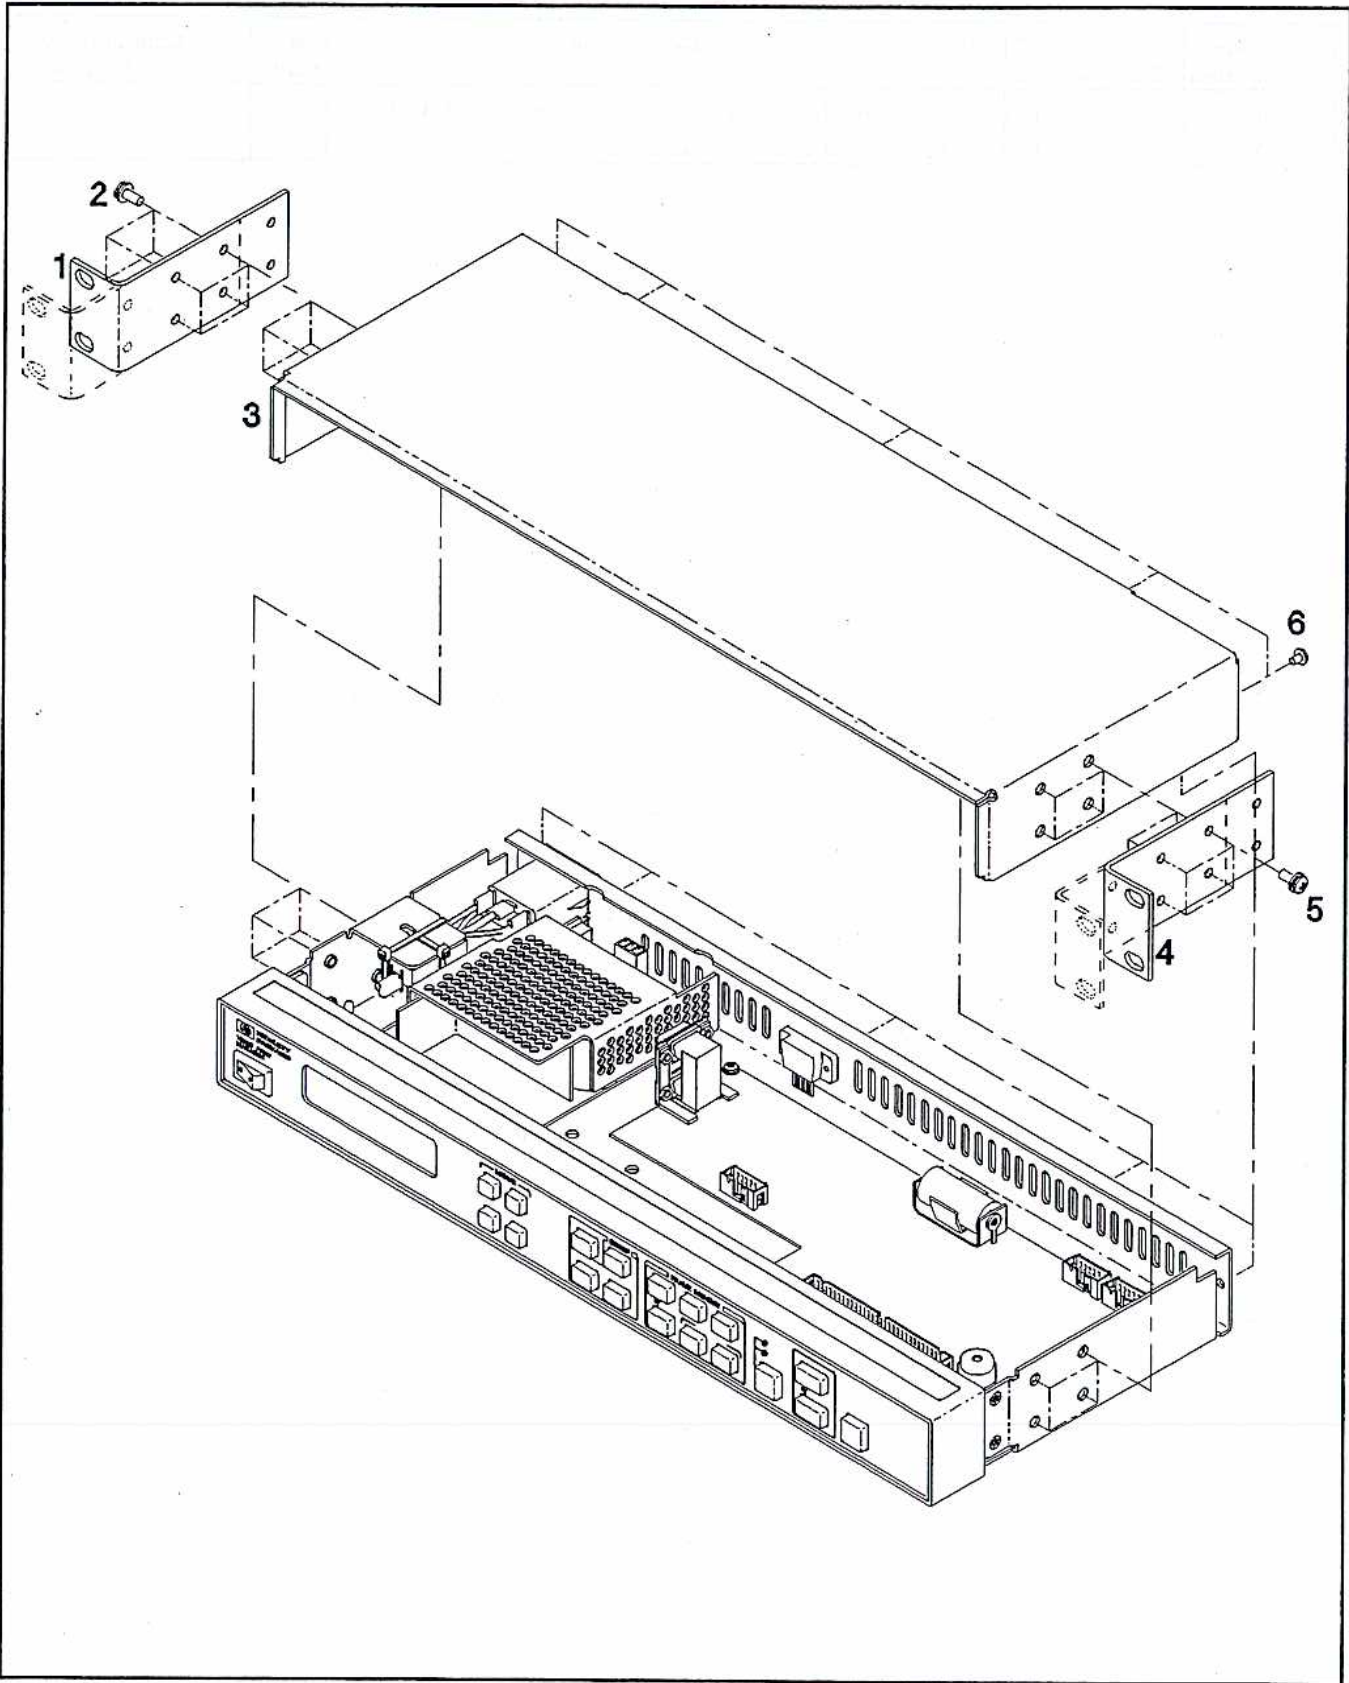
Cover Illustrated Parts Breakdown—HP Remote Front Panel
